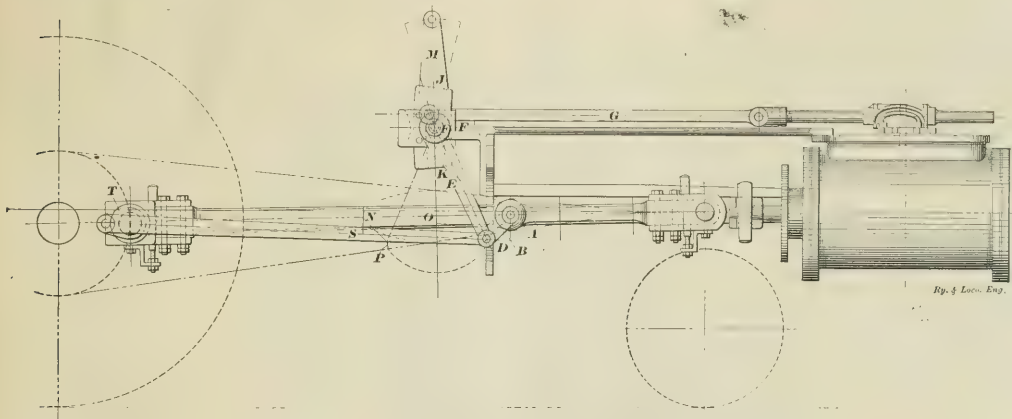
JOY'S VALVE GEAR MODIFIED TO RAISE PARTS FROM TRACK.
